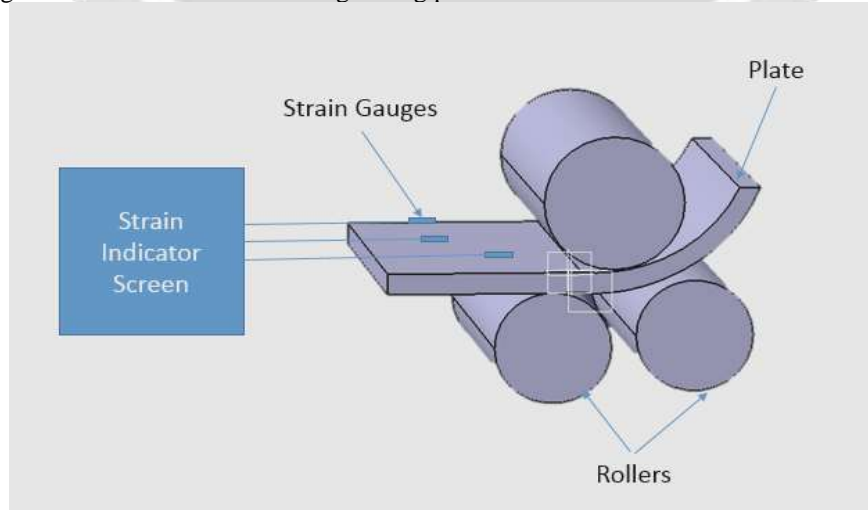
Schematic Block diagram for testing on three roller bending machine.
